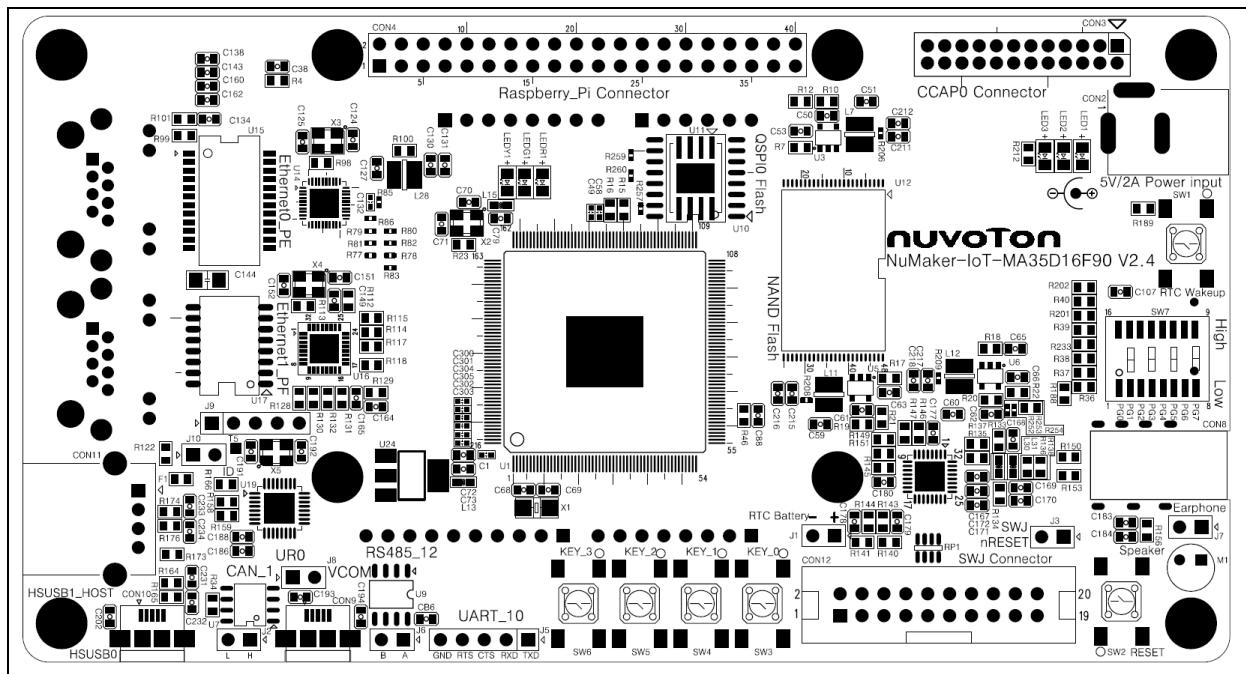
Front PCB Placement of NuMaker-IoT-MA35D1-A1 Board
